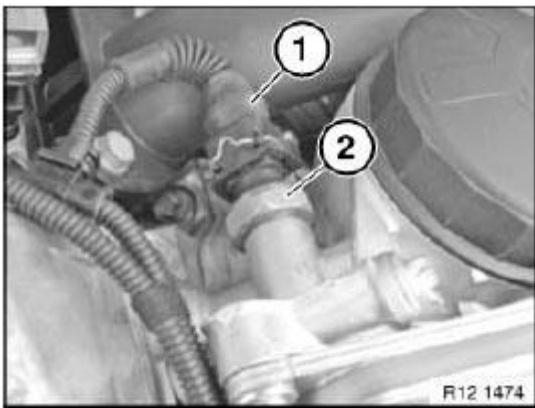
Identifying Plug Connection On Oil Pressure Switch
